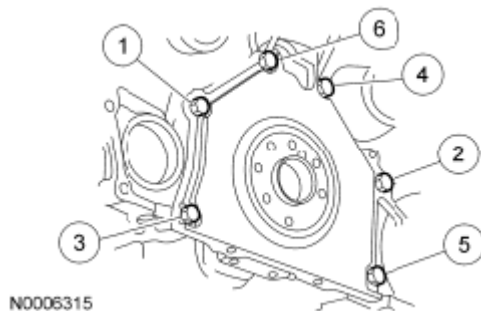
Identifying Crankshaft Rear Seal Retainer Plate Bolts Tightening Sequence
